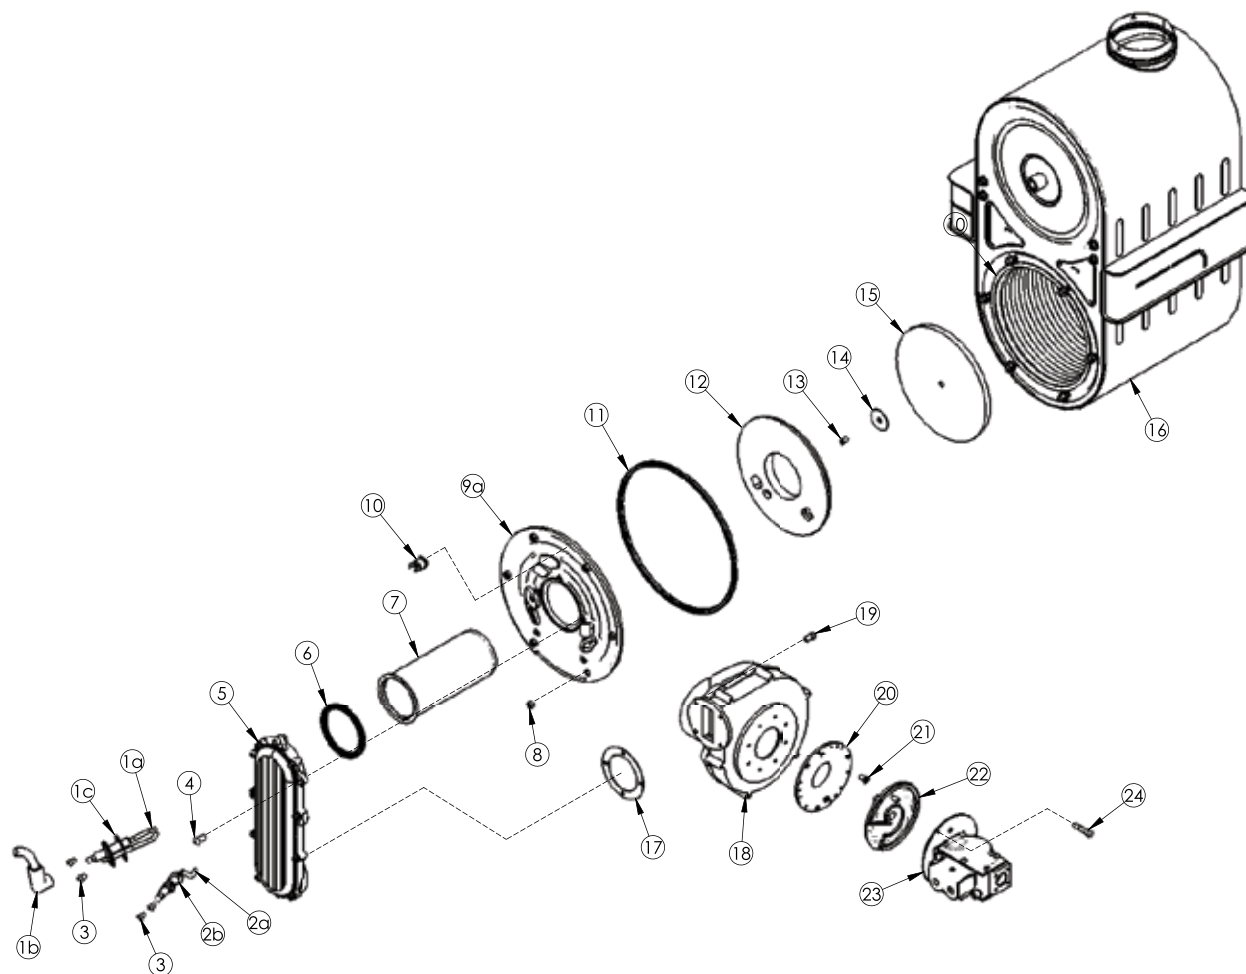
Heat Exchanger/Burner Assembly Repair Parts
